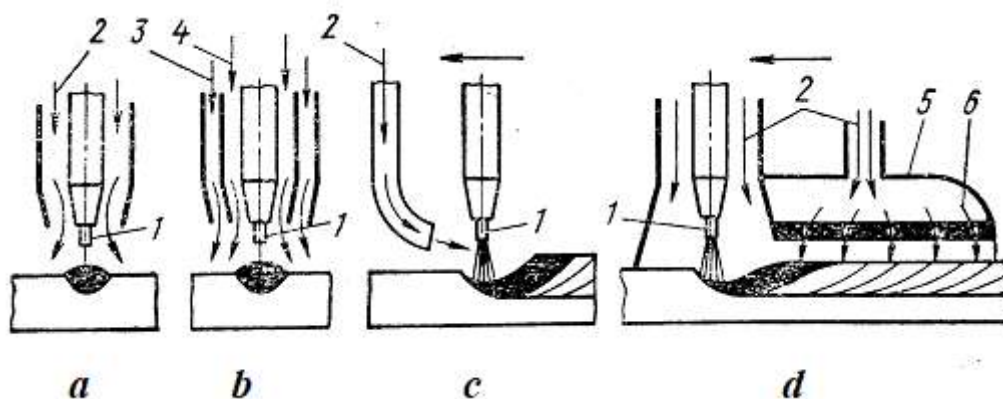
Supply of shielding gases to the welding zone:
